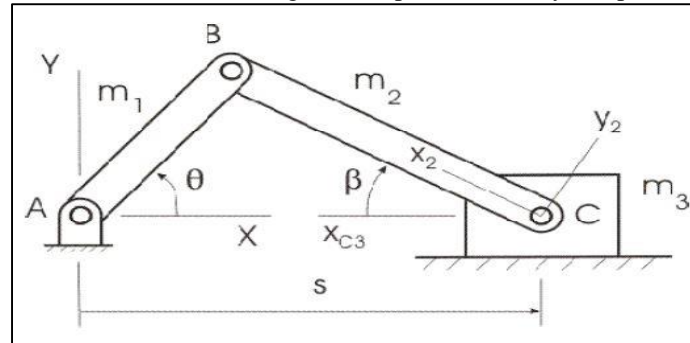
Parametric representation of the crankshaft, connecting rod, and piston assembly
